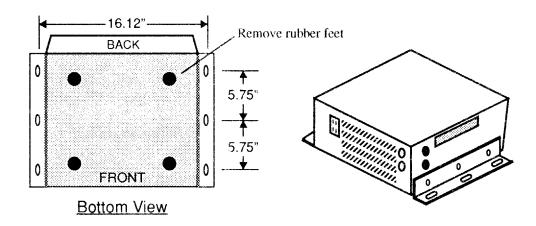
Surface Hole Locations for Vertical Mounting (Installer Supplied)
